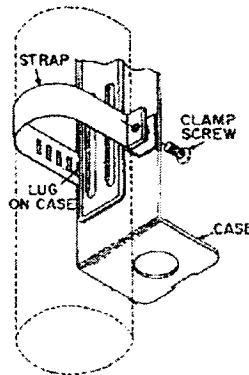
Skeleton view of case, mounting plate (temperature element), and mounting strap. First fasten strap to case by the clamp screw. Place control on tube or pipe and place slot of mounting strap over tab on case. Tighten clamp screw to a snug fit. CAUTION: Do not tighten too tightly. Strap must not be inside of cover. Control mounting plate is also the temperature element and must not be dented or crushed as this will change control setting. Clip off or bend back excess strapping.
